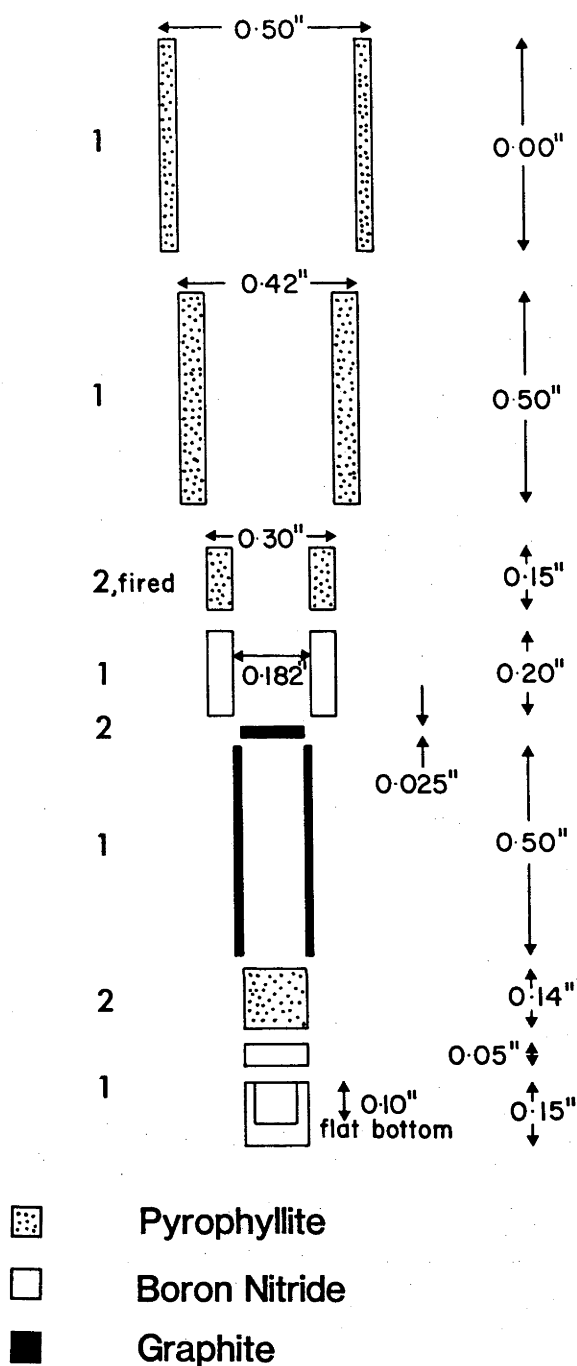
'Exploded' view of the components used in the construction of the 0.180" diameter graphite furnace assembly for runs in the HPG apparatus. Numbers on the left side indicate the number of components used in the cell.
